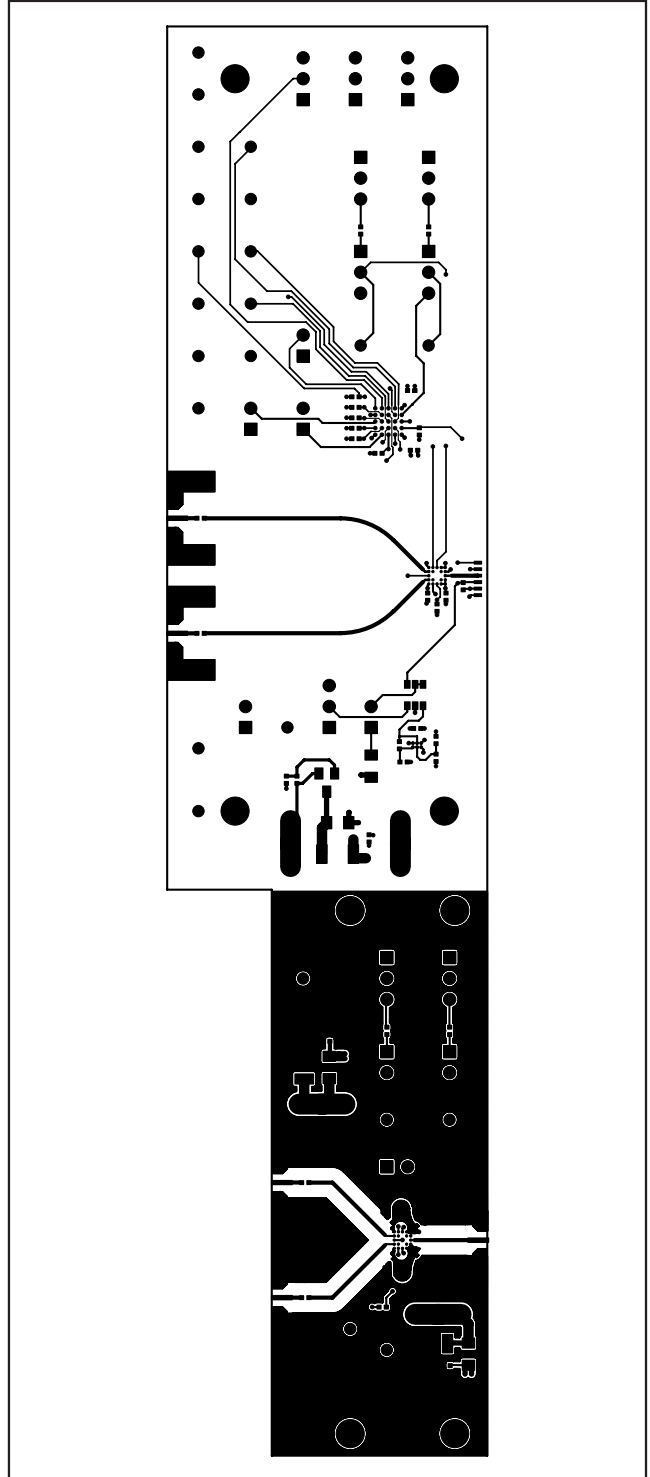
MAX3975 EV Kit PCB Layout—Component Side
